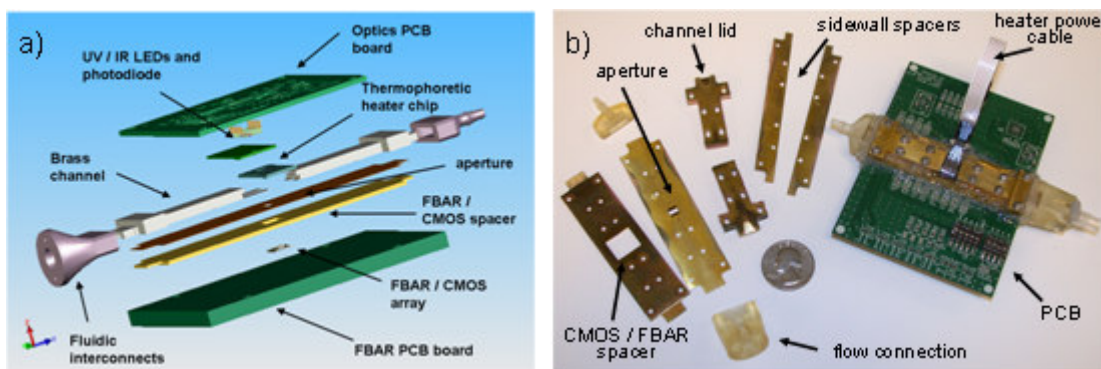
(a) Exploded SolidWorks view of the MEMS PM package; (b) photograph of the assembly and the individual parts.
